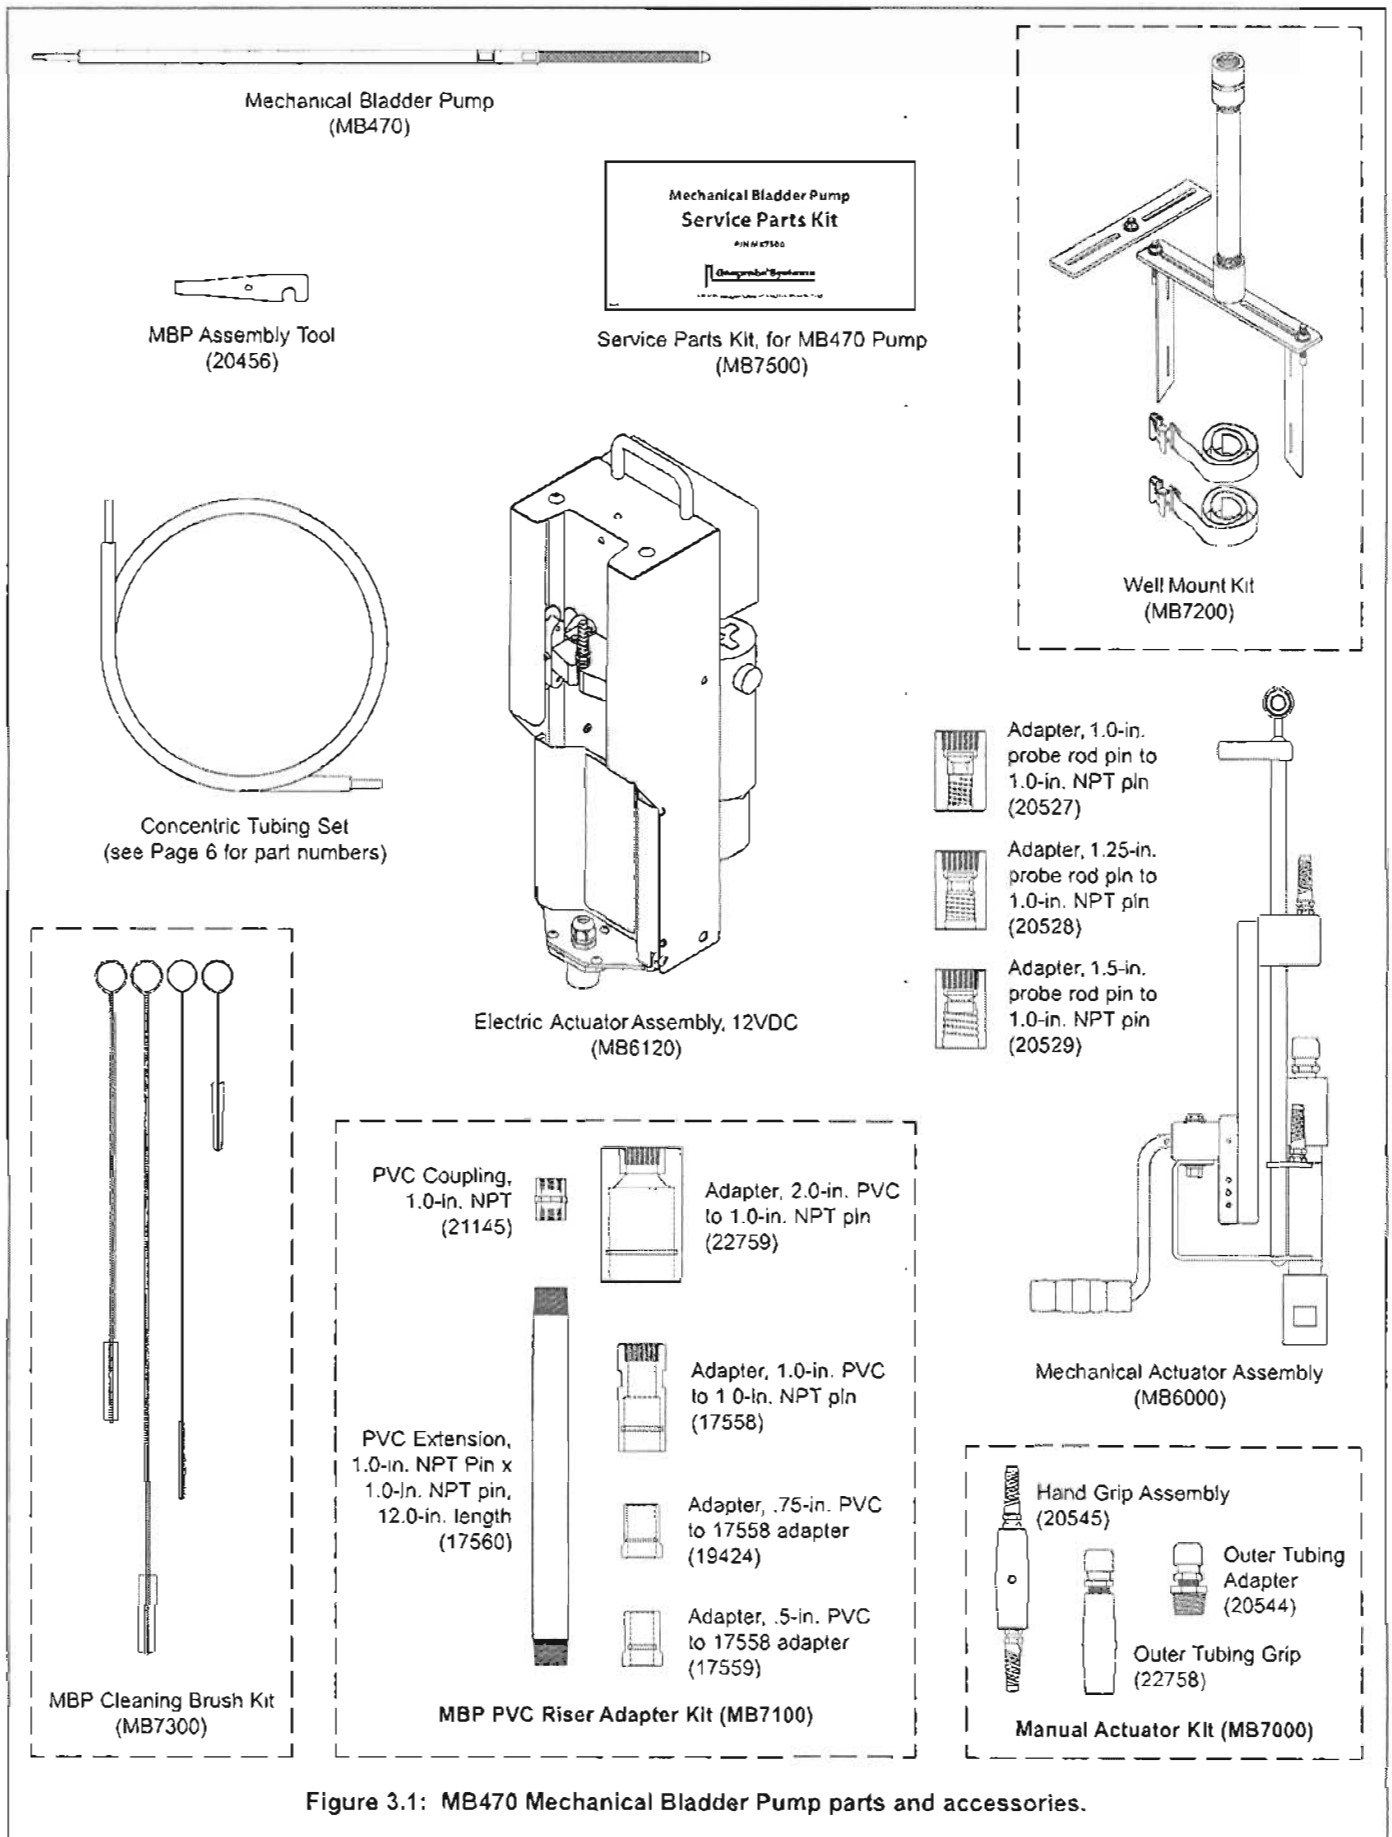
MB470 Mechanical Bladder Pump parts and accessories.
